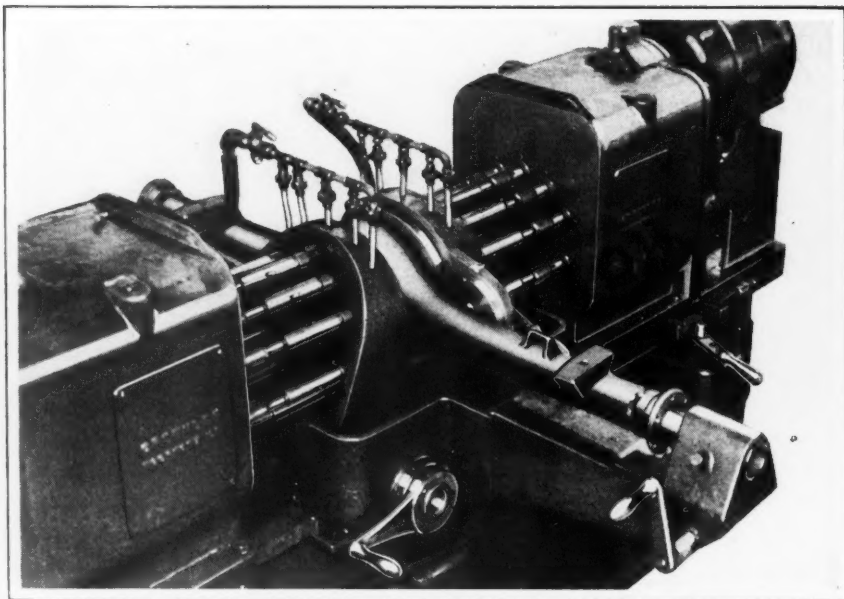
Equipment Employed for Simultaneously Tapping All the Holes Drilled in the Operation Shown in Fig. 5
